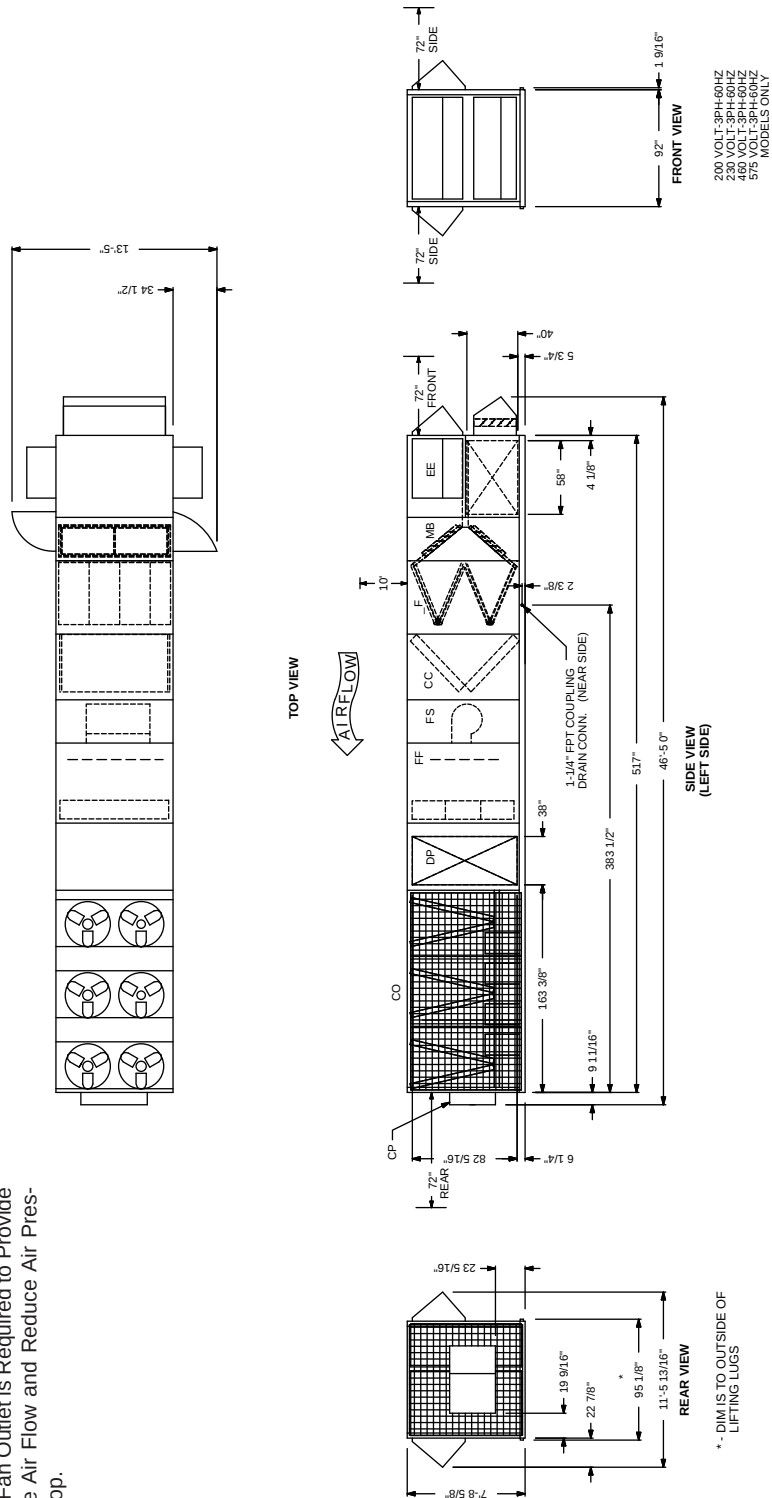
GENERAL ARRANGEMENT DRAWING
